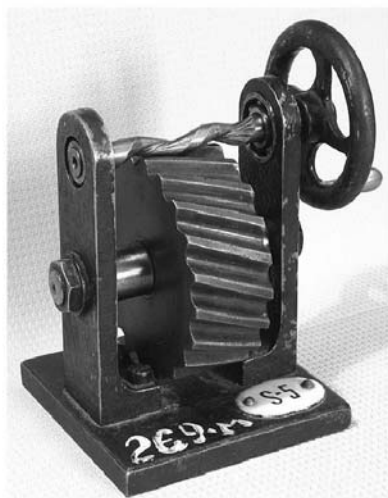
The helical gearing with the number of teeth of the pinion equal to one
